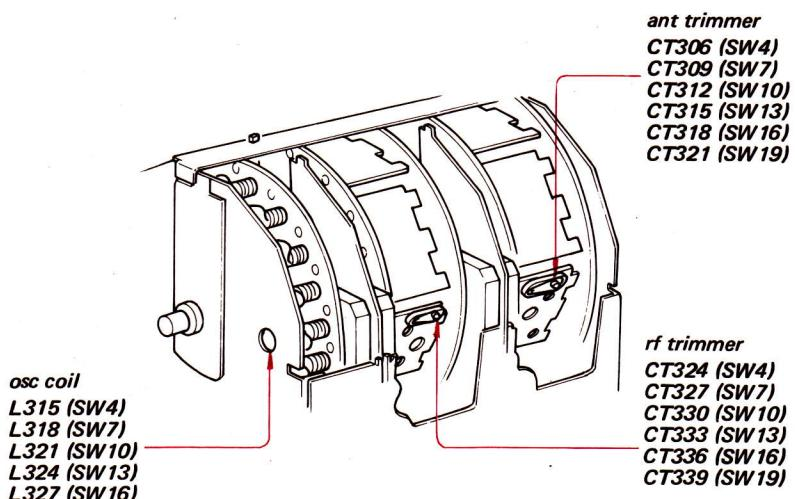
Adjusting parts location for SW4, SW7, SW10, SW13, SW16 and SW19
